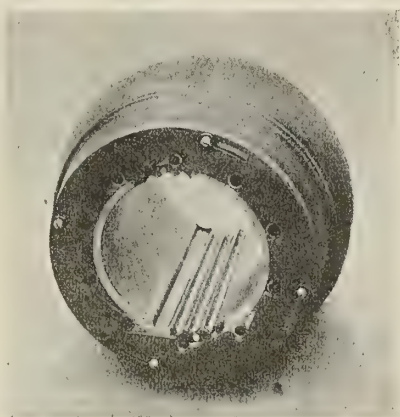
Main Gyro Bearing Photographed After 10,000 Precession Loads, Tool Marks Still Visible
